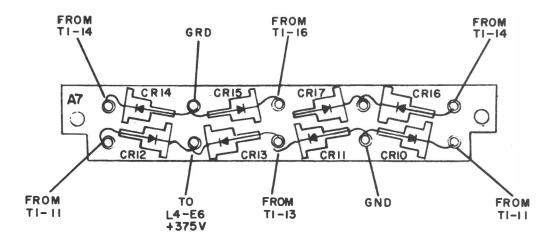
DC-to-DC Converter Board (3A2A5A5), Component Location
